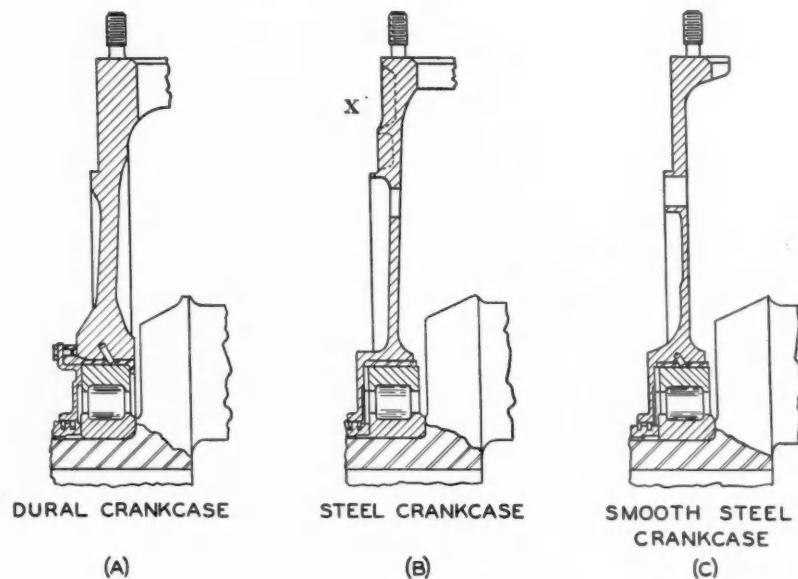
The usual duralumin construction of crankcase for a radial engine with two improved designs
